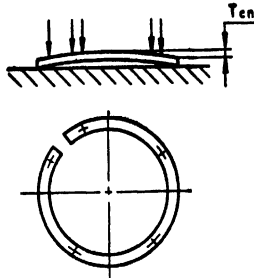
MEASUREMENT OF FLATNESS OF SIDE FACES
